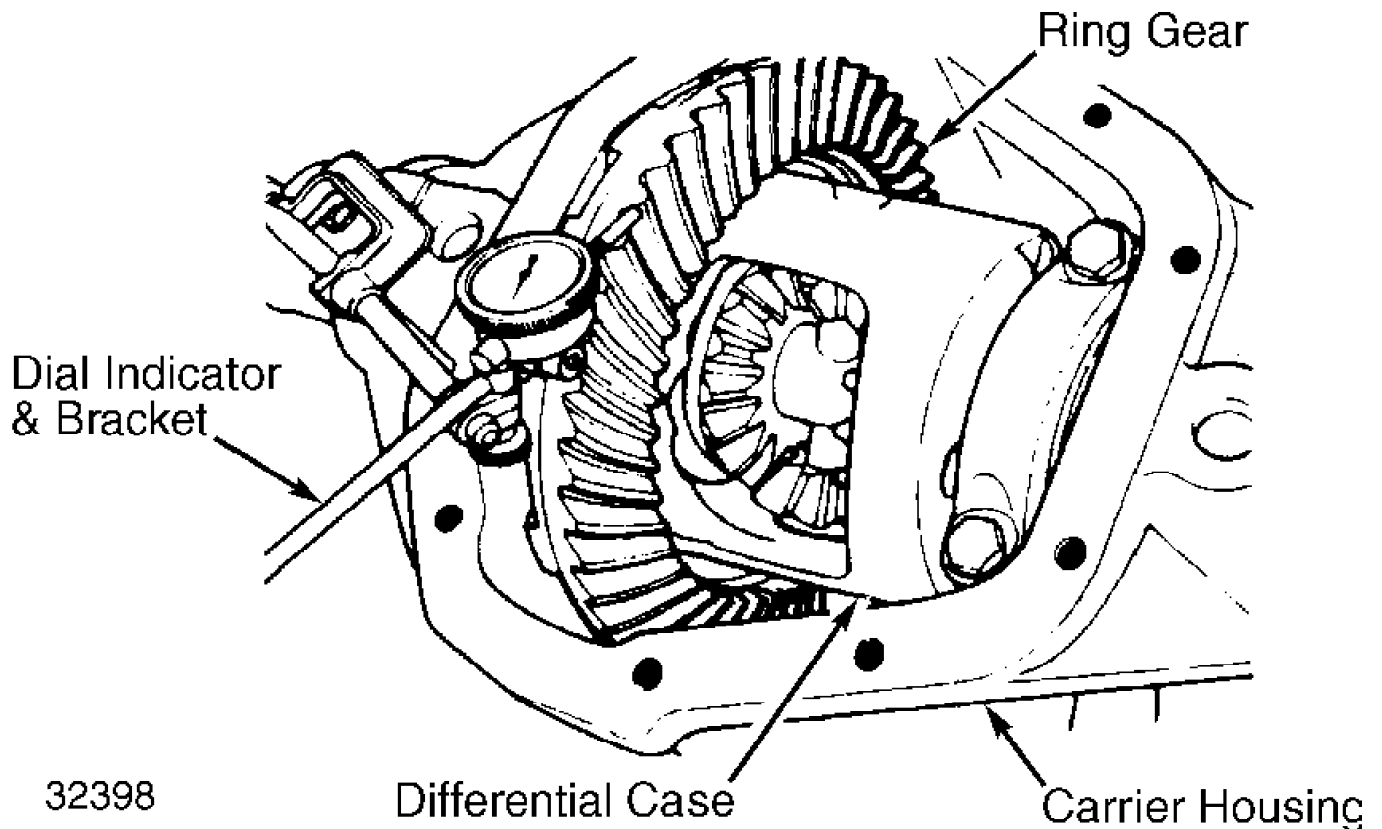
Measuring Backlash Between Ring & Pinion Gears
